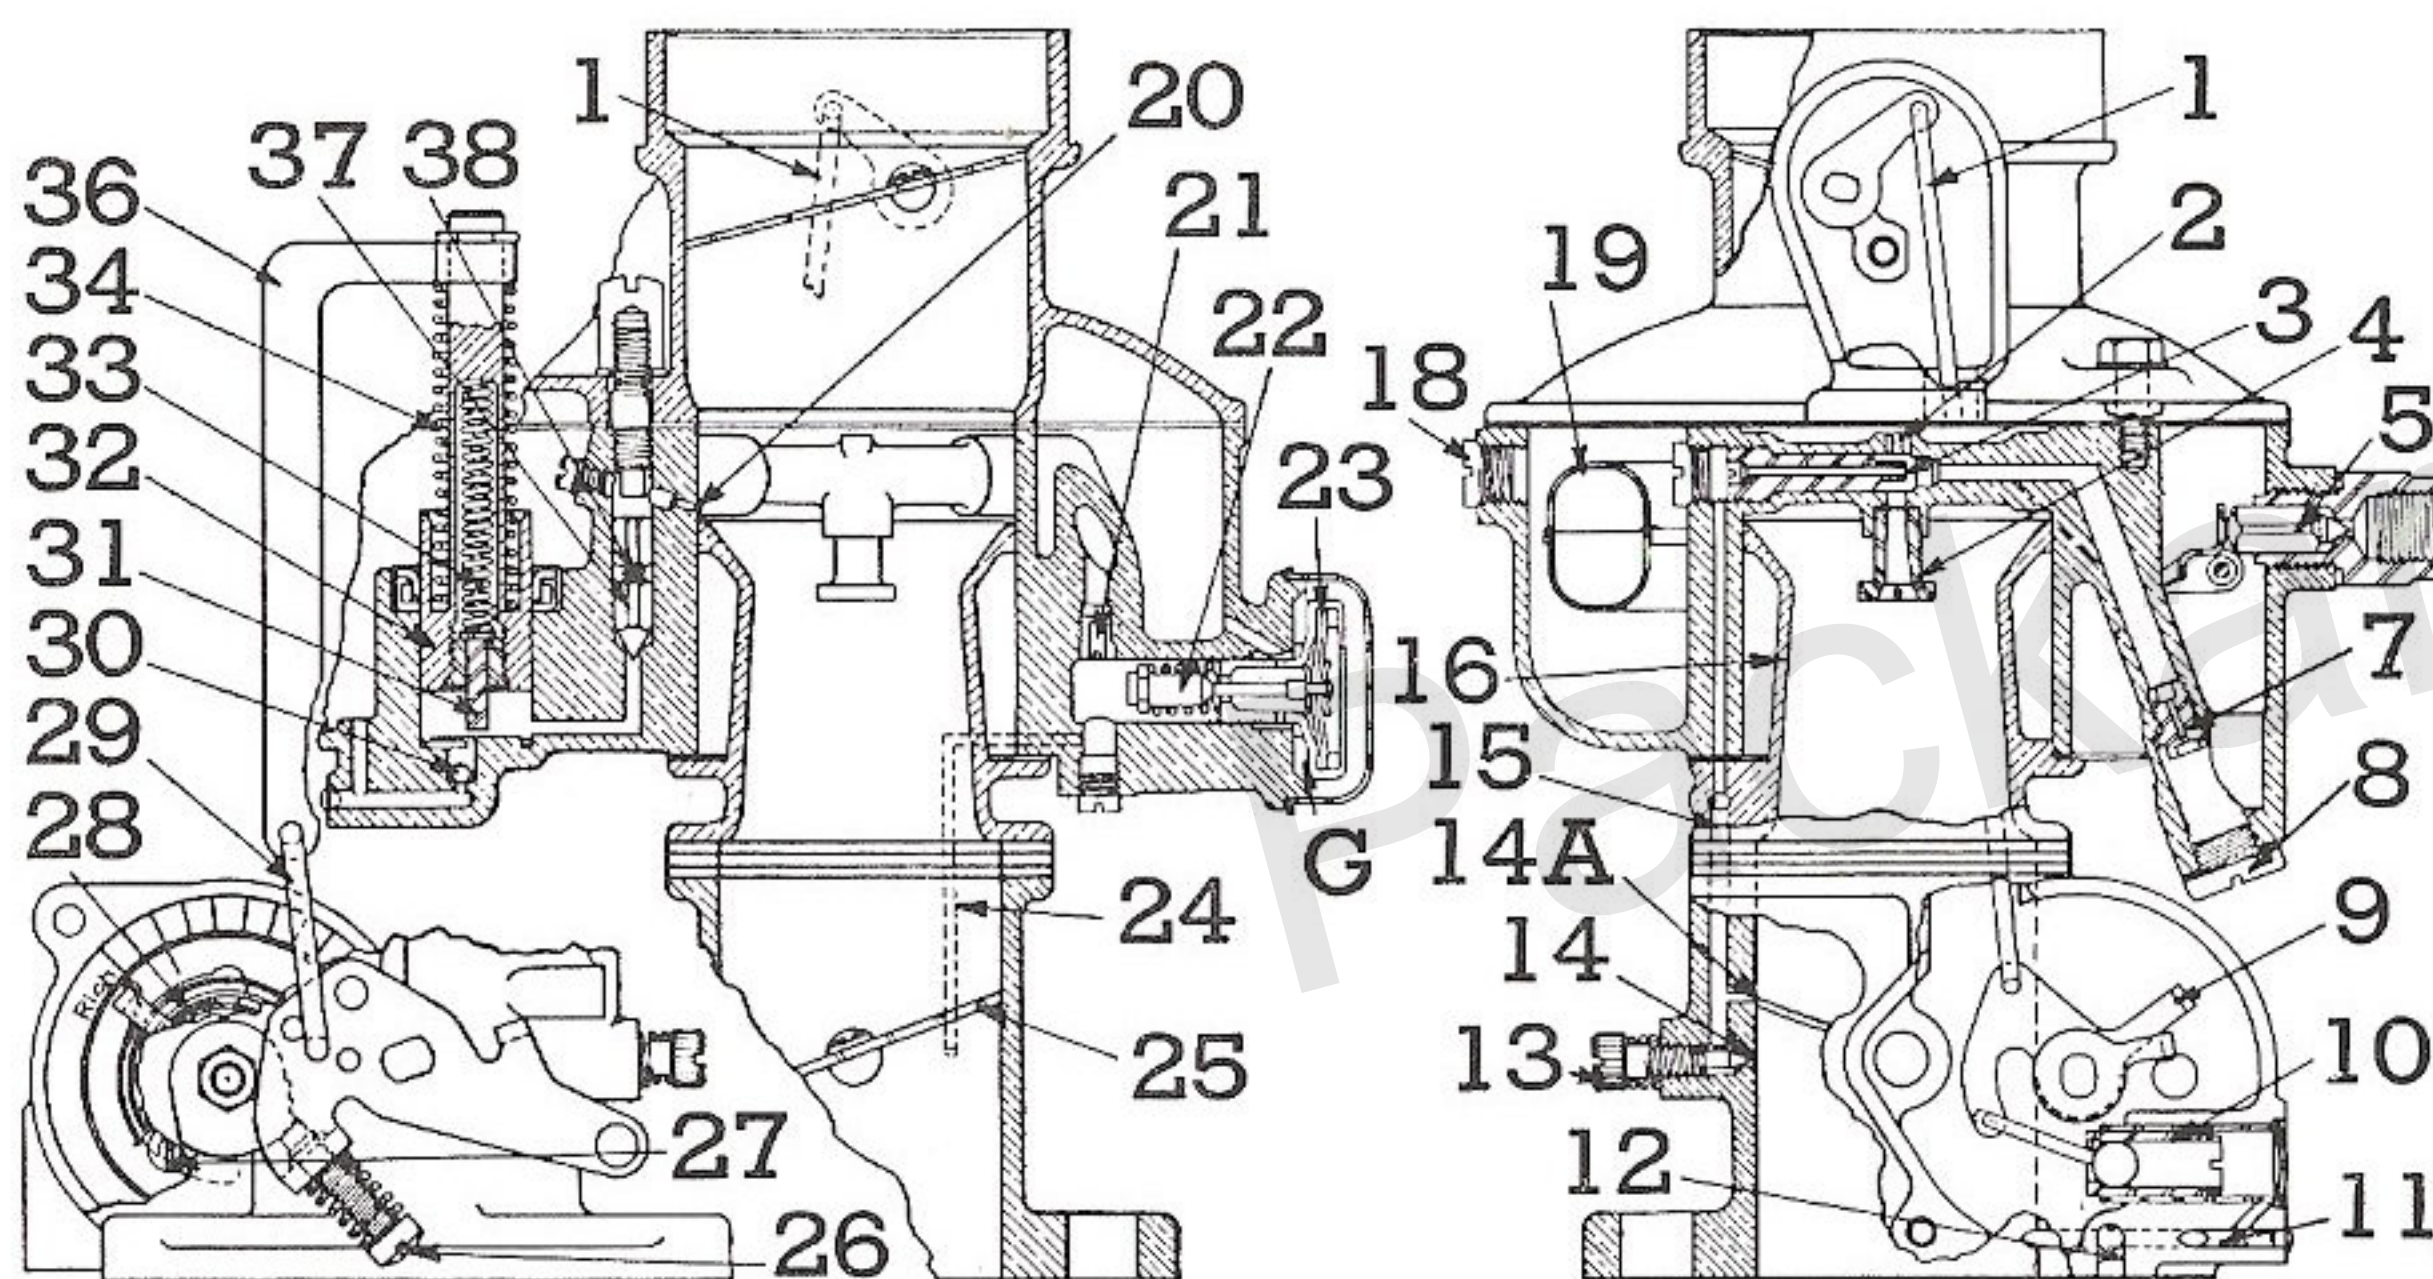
Sectional View of C and G Carburetor Used on Packard Six
